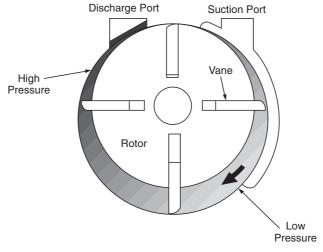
Sectional View of a Rotary Vane Compressor
